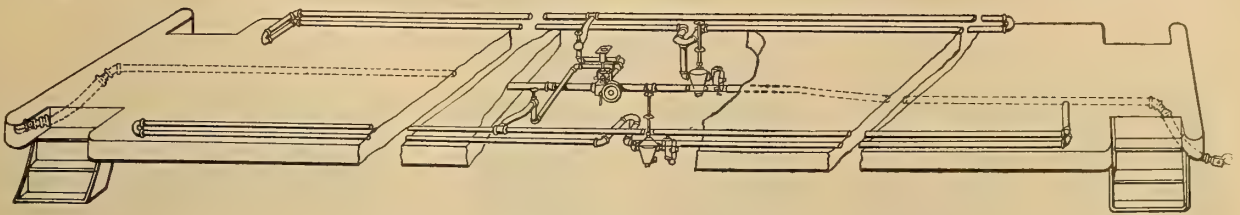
PLAN OF CAR SHOWING SYSTEM OF PIPING.
